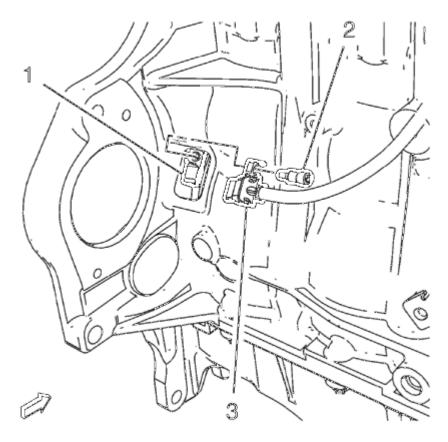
Crankshaft Position Sensor And Bolt Courtesy of GENERAL MOTORS COMPANY
